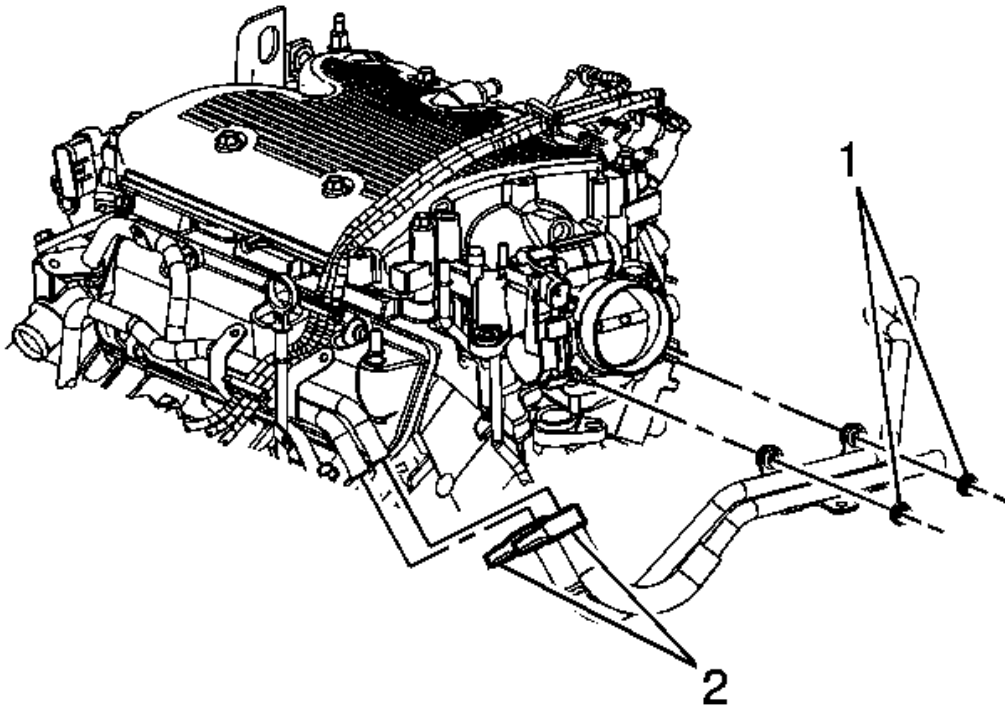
Identifying Heater Inlet And Outlet Pipe Nuts
